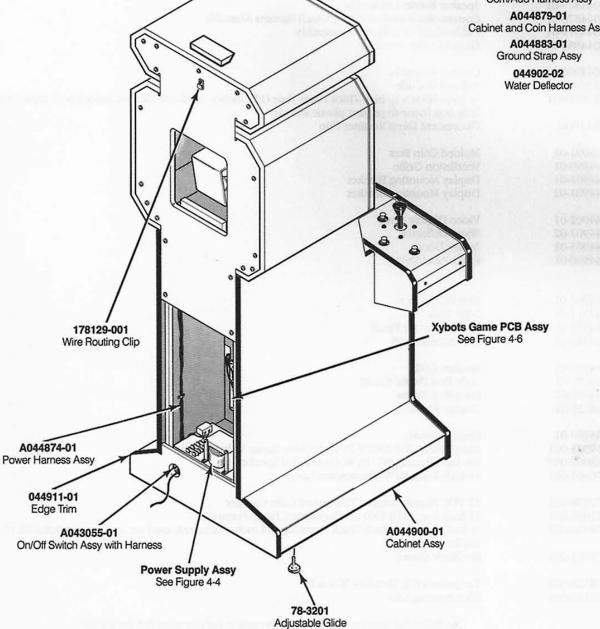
Cabinet-Mounted Assemblies, Continued
